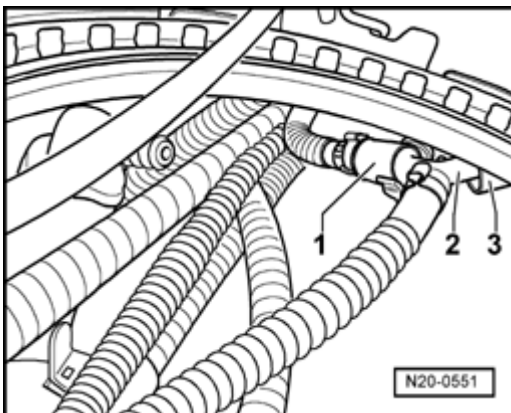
Supply Hose And "Y-Piece" On Left Side
